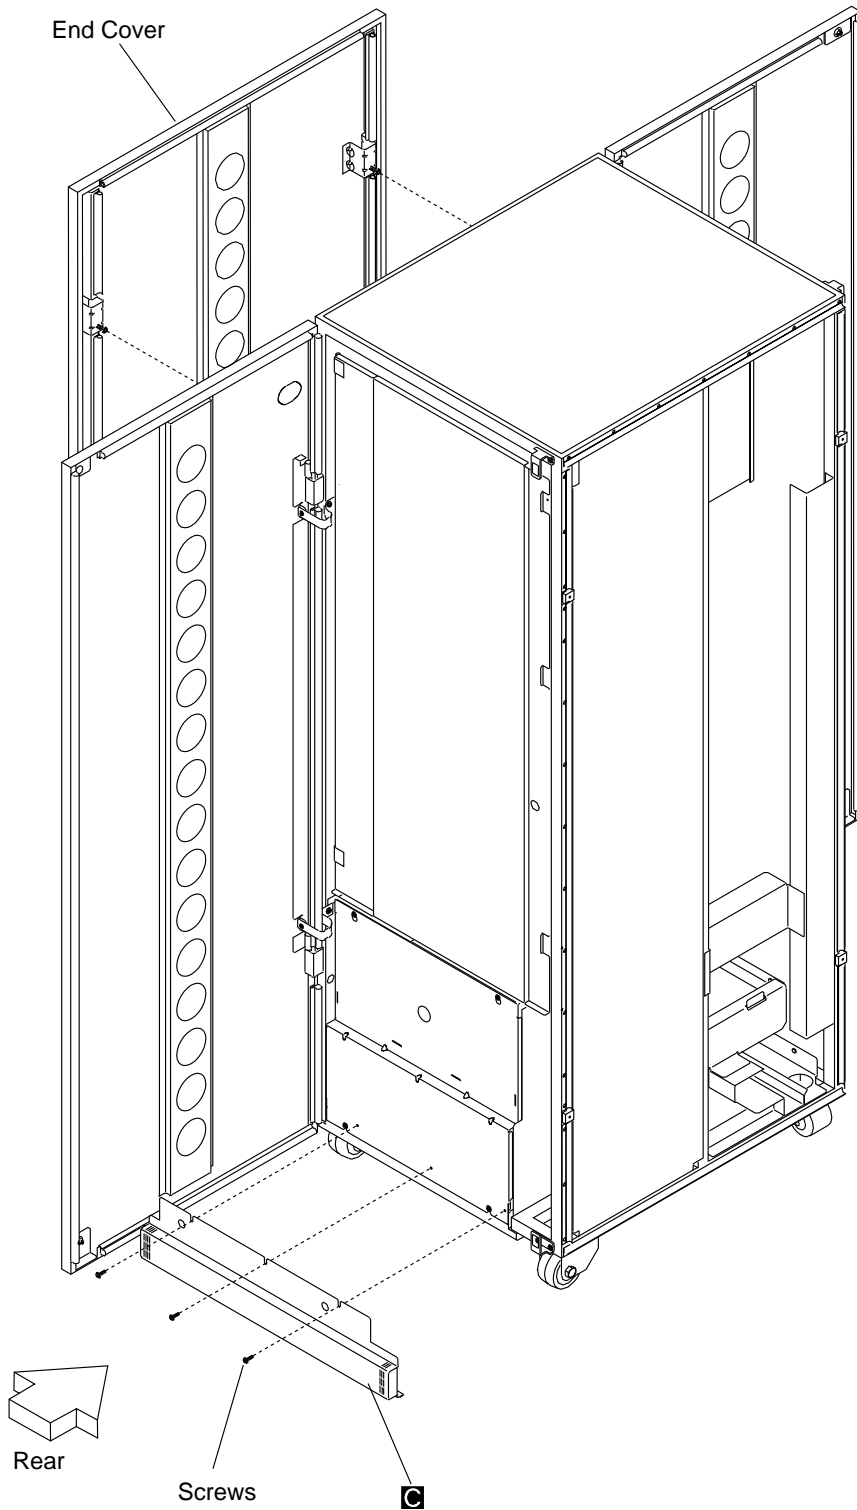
Ground Bracket on a 3746-A Expansion Unit (Rear View)
